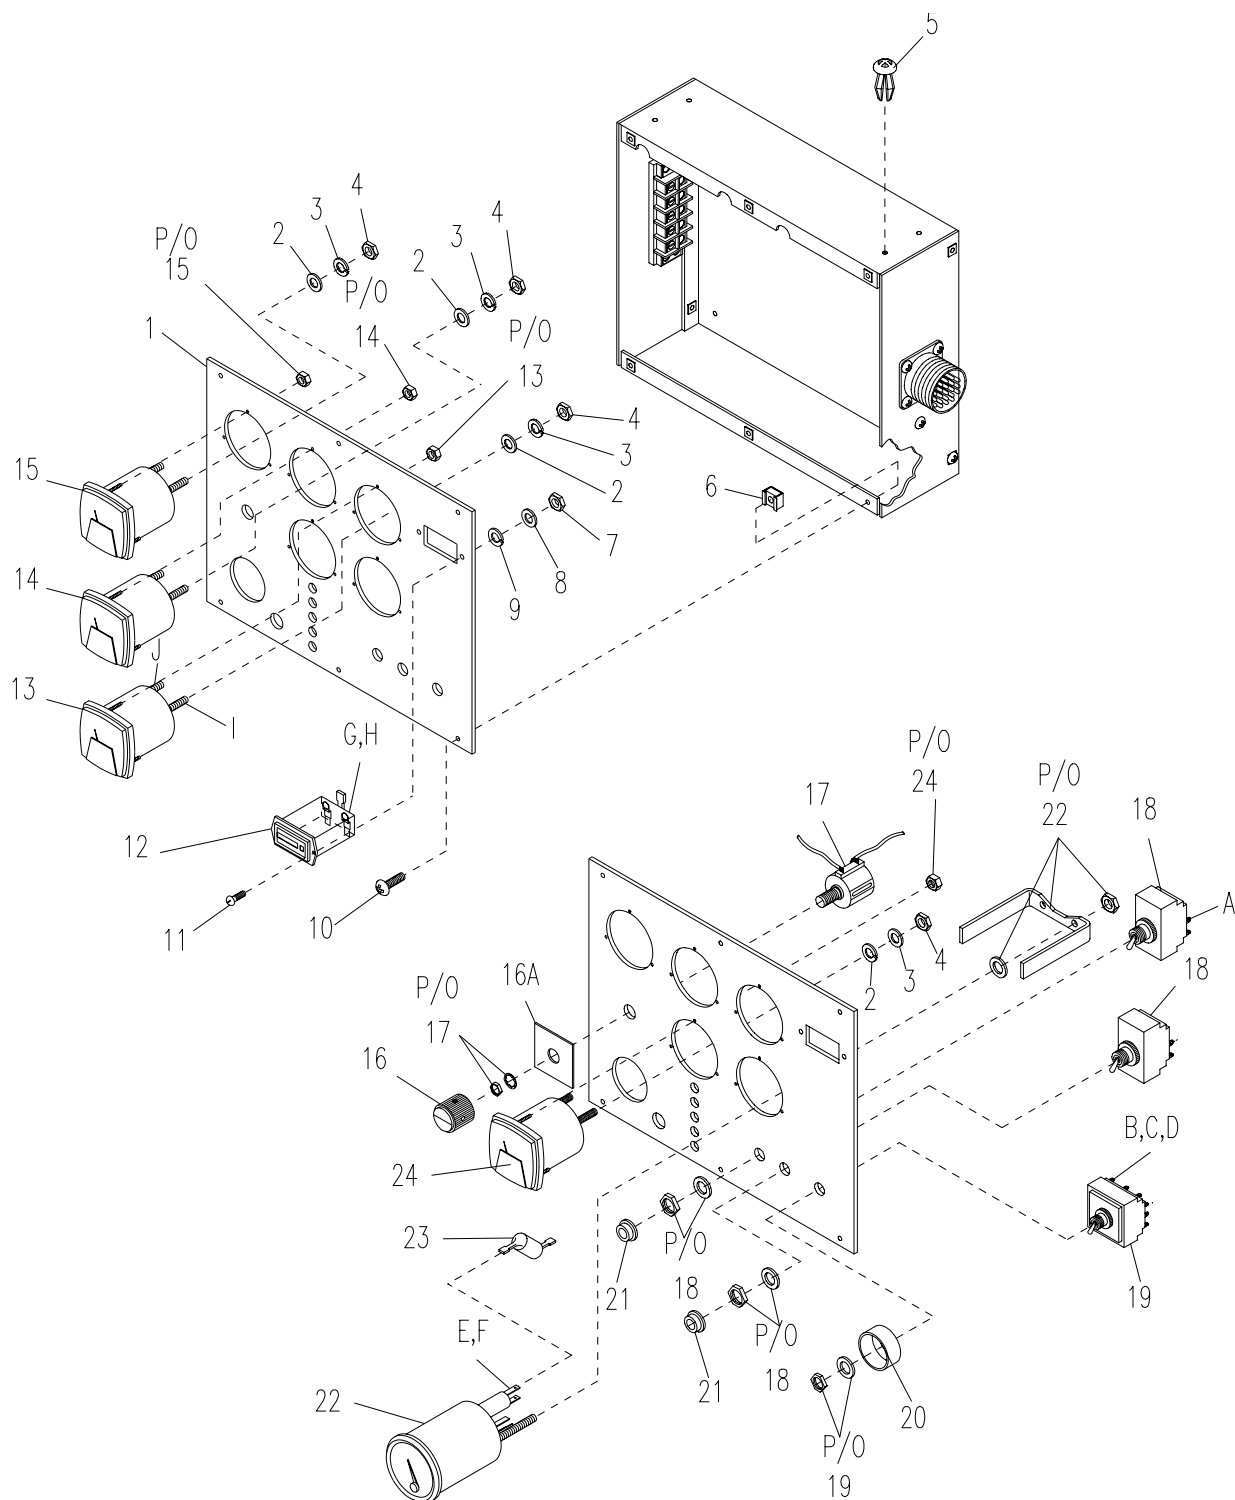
APU Control Box Assembly (Sheet 1 of 3)
